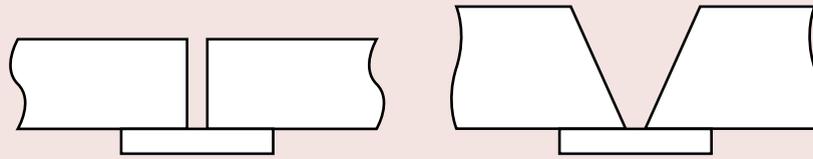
Flux Cored Arc Welding of Plain Carbon and Low Alloy Steels Using External Shielding Gas
